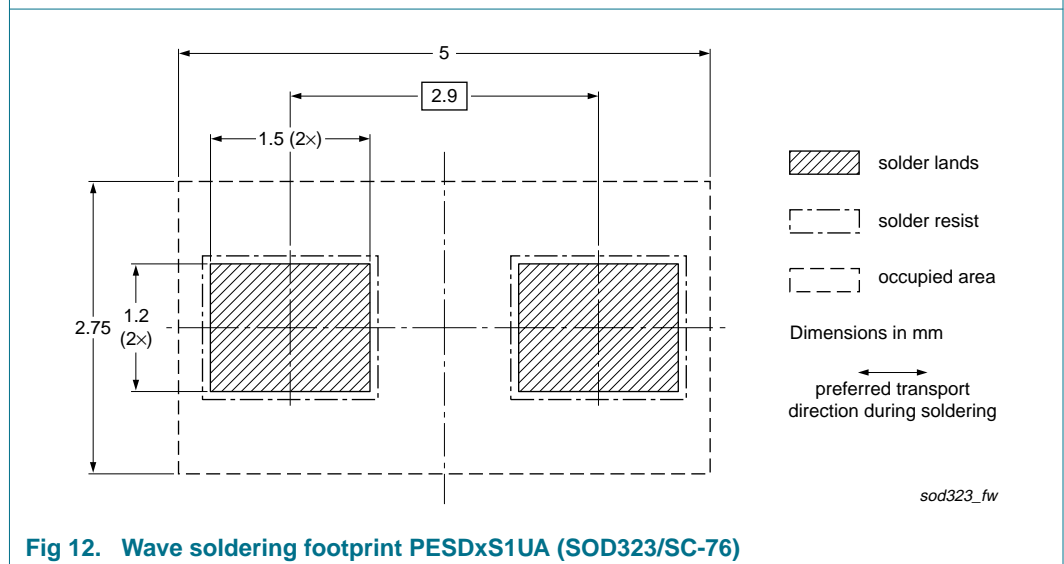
Wave soldering footprint PESDxS1UA (SOD323/SC-76)
